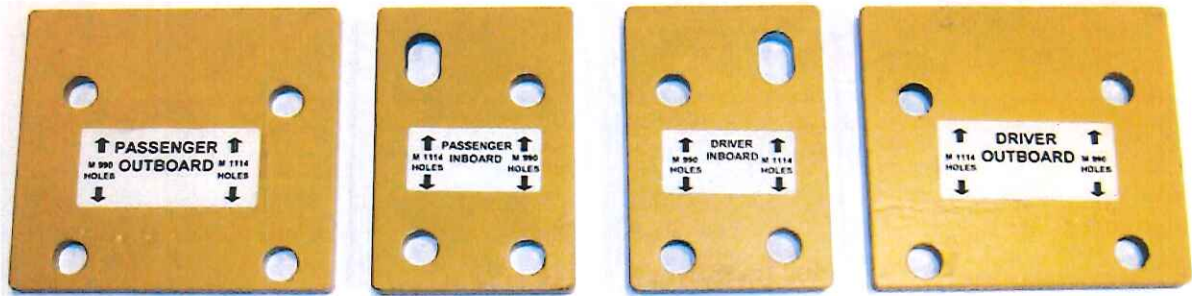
OUTBOARD (D3) AND INBOARD (D4) MOUNTING BOLT WASHER PLATES
